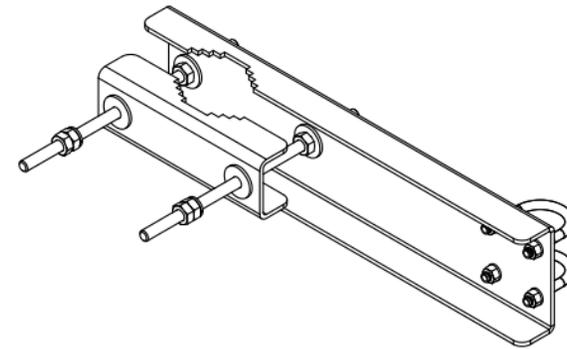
MBC-04 Mast Bracket Clamp BOM & Assembled View
